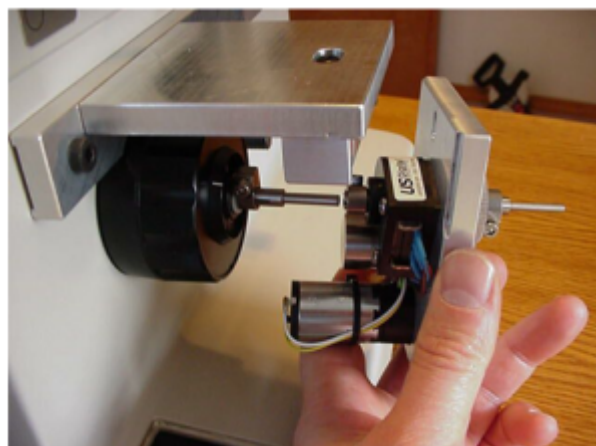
Install drive by sliding 2nd drive shaft over the 1st drive shaft
